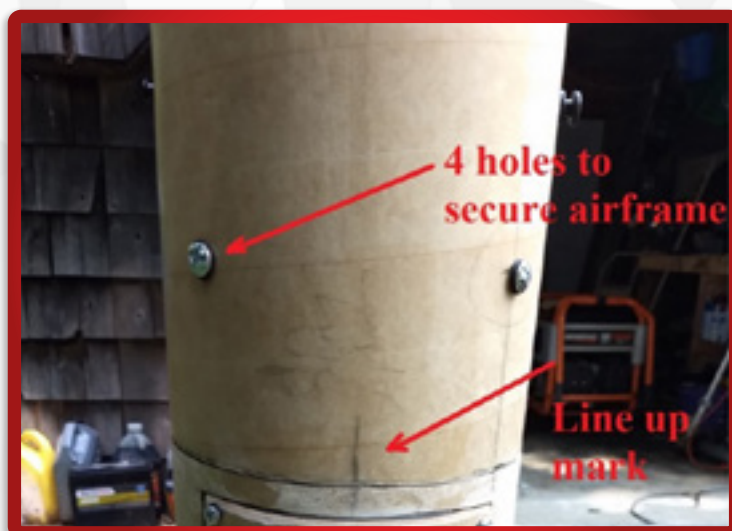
CENTERLINE MARK AND BOLTS WITH O-RINGS
